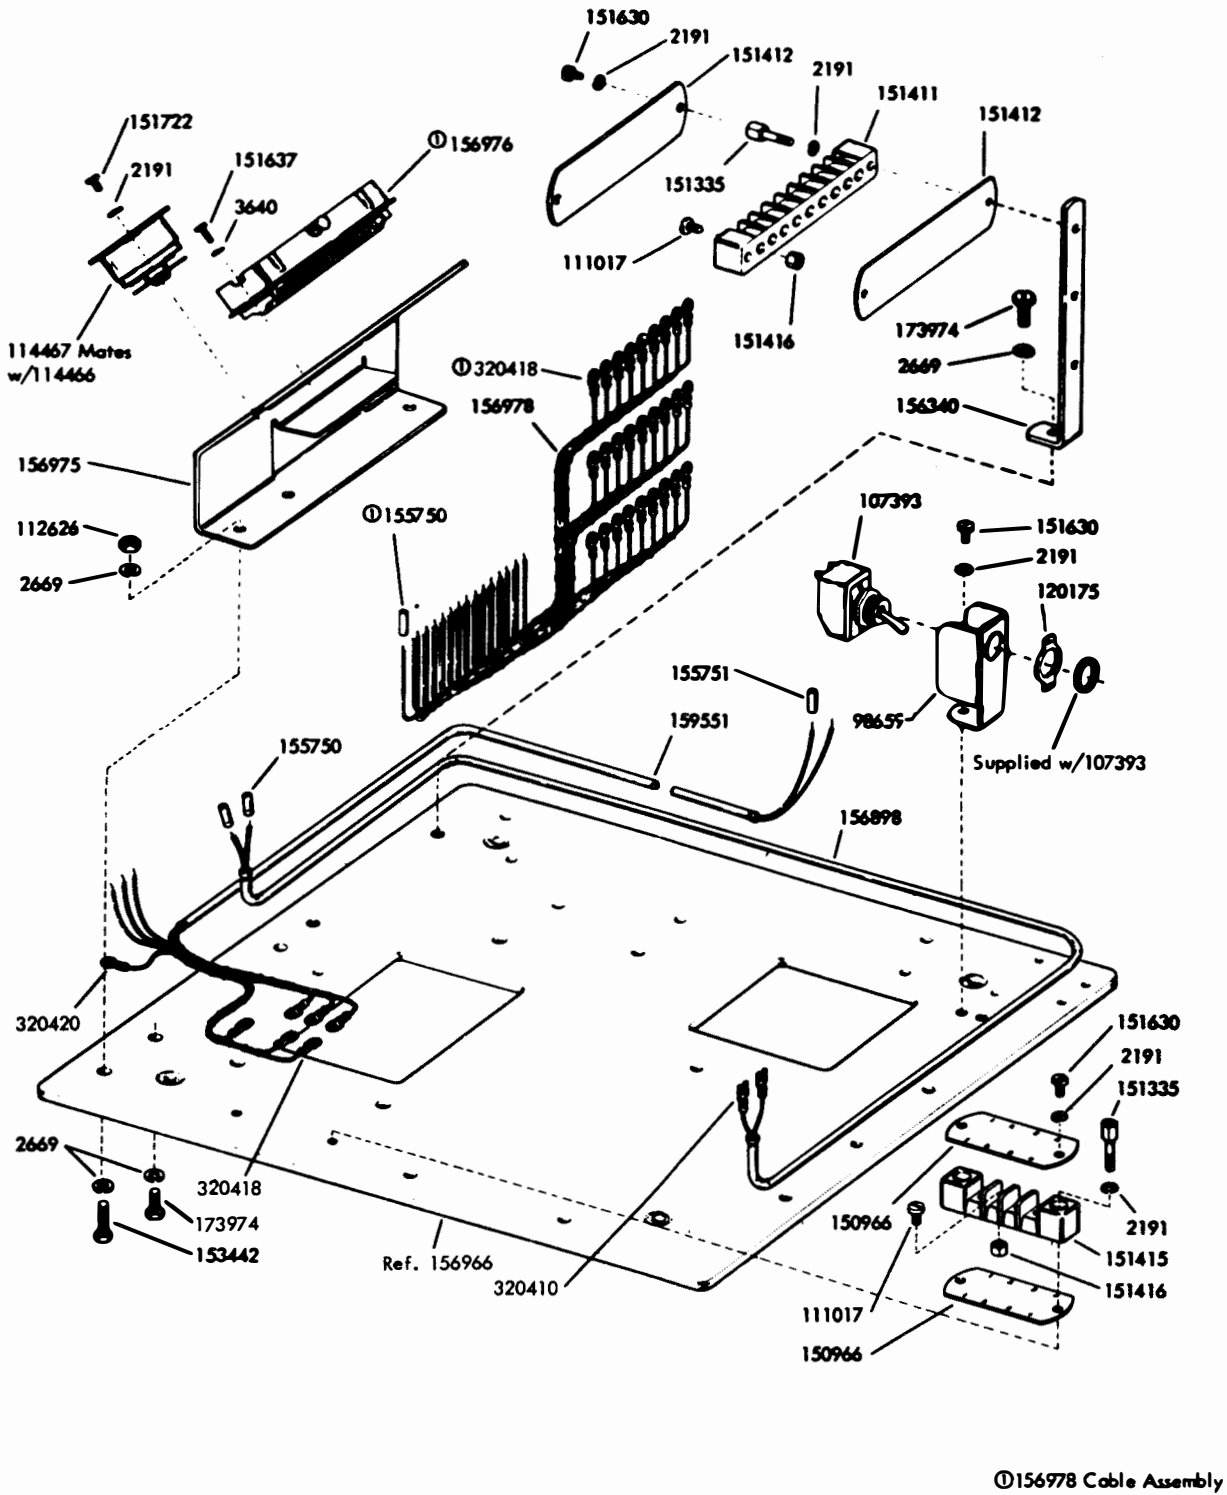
Reperforator Base - Single-Plate (Sheet 1 of 2)
